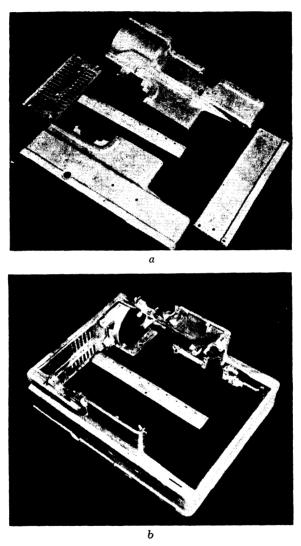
a. Die-cast aluminum components for a typewriter frame. b. The completed frame after assembly by welding.
